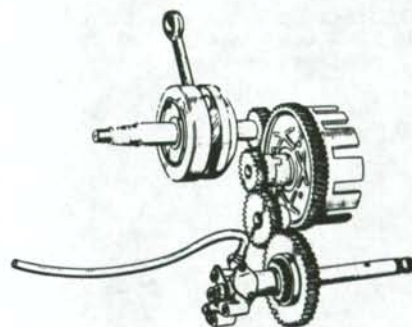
Different oil pump drives have been used. Early models have oil pump mounted on right side of engine and drive from crankshaft. Later units mount oil pump at left rear of engine (right view) and drive through kick idler gear.
